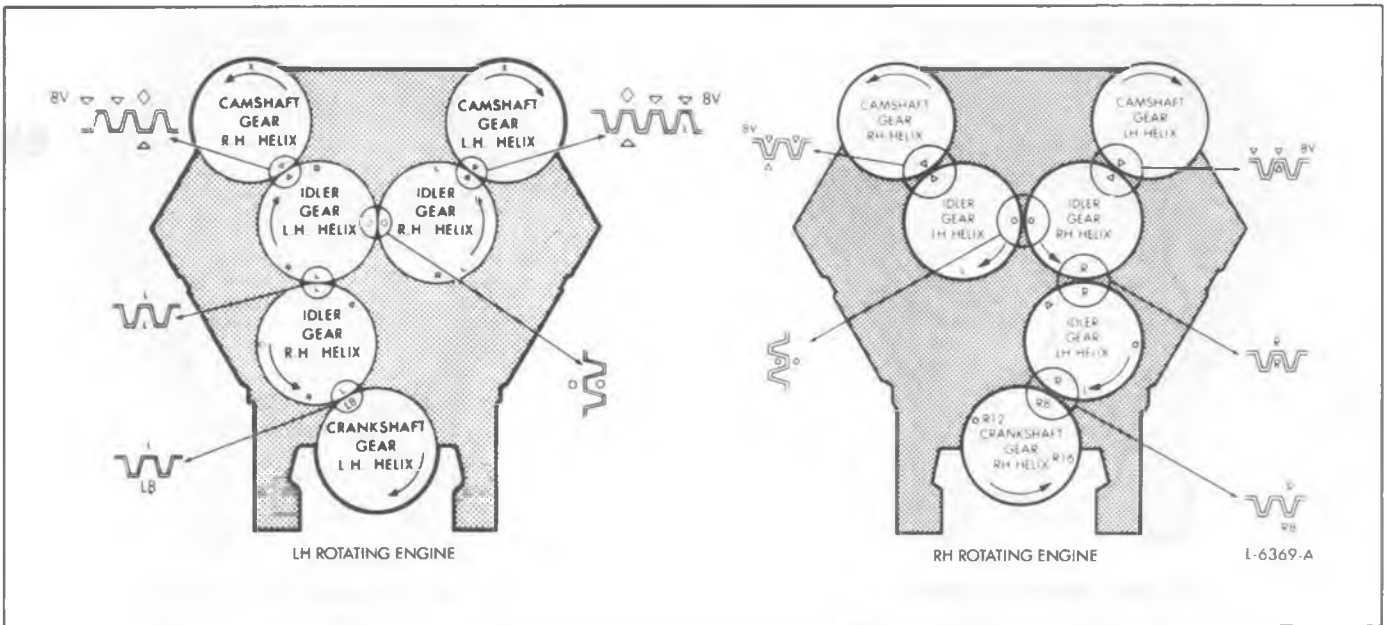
Rear Gear Train Timing Marks - 12V And 16V Engines
